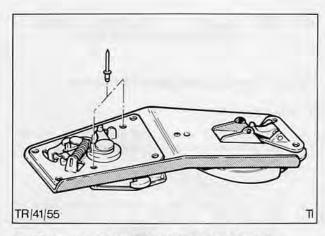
'Pop' rivet location, lock assembly to lockplate
